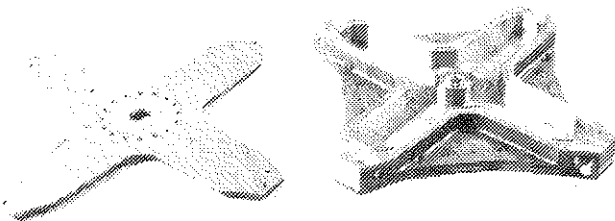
HUB PLATES MANUFACTURING TOOL
